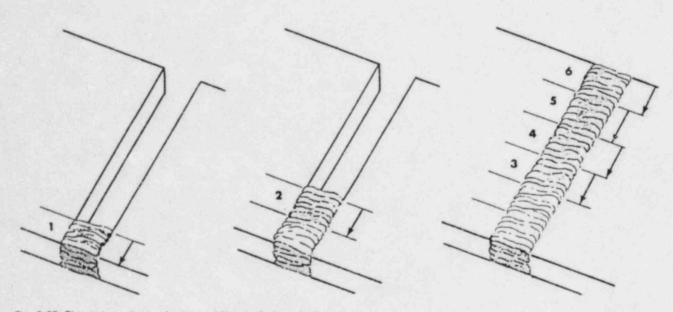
This is how the back-step welding technique is done.
